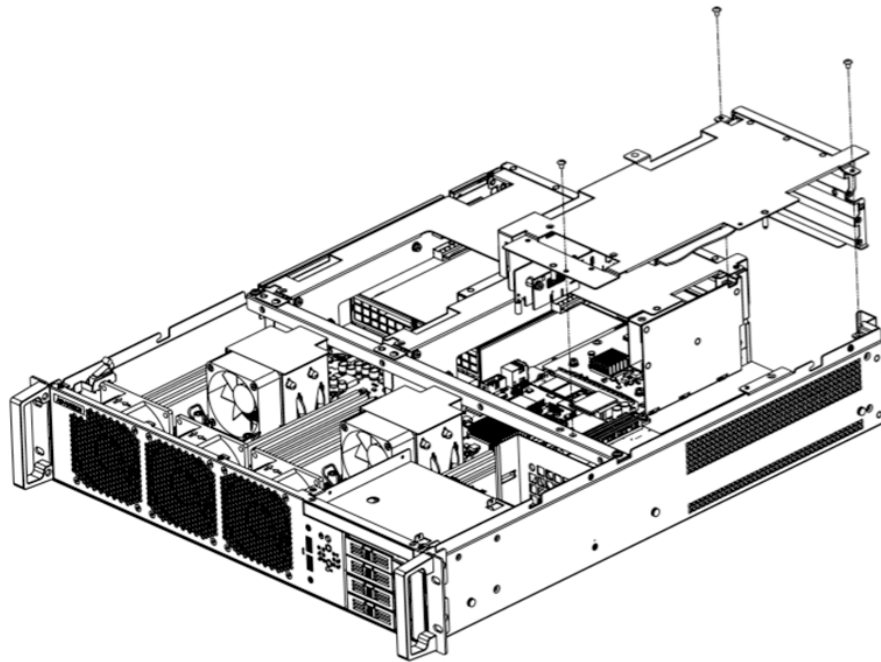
Assembly of Riser Card-1 Module/安裝Riser Cage-1模块/安裝Riser Cage-1 模組
